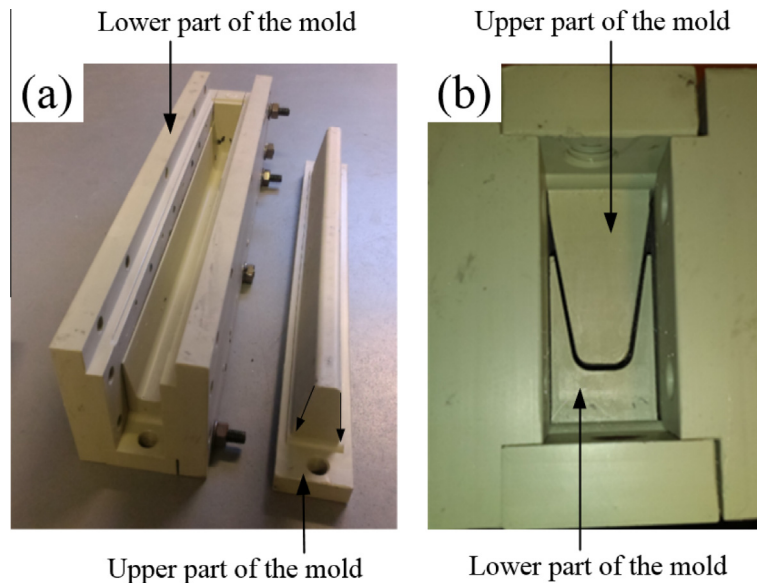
(a) The lower and upper parts of the peel stopper polypropylene mould and (b) side view of the assembled mould showing the peel stopper shape.
